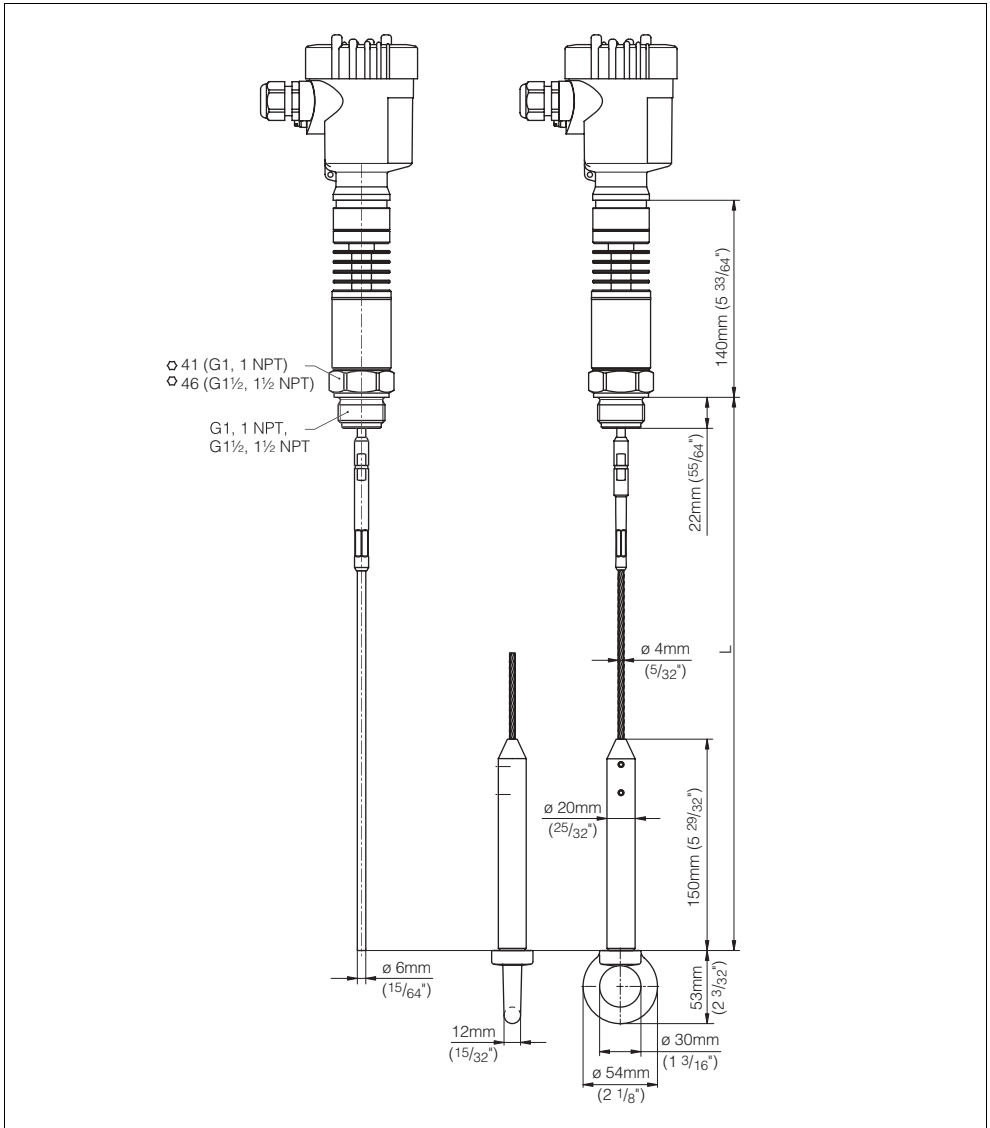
KSR-GT 666 (-20° ... +250°C) - cable, rod version with thread
